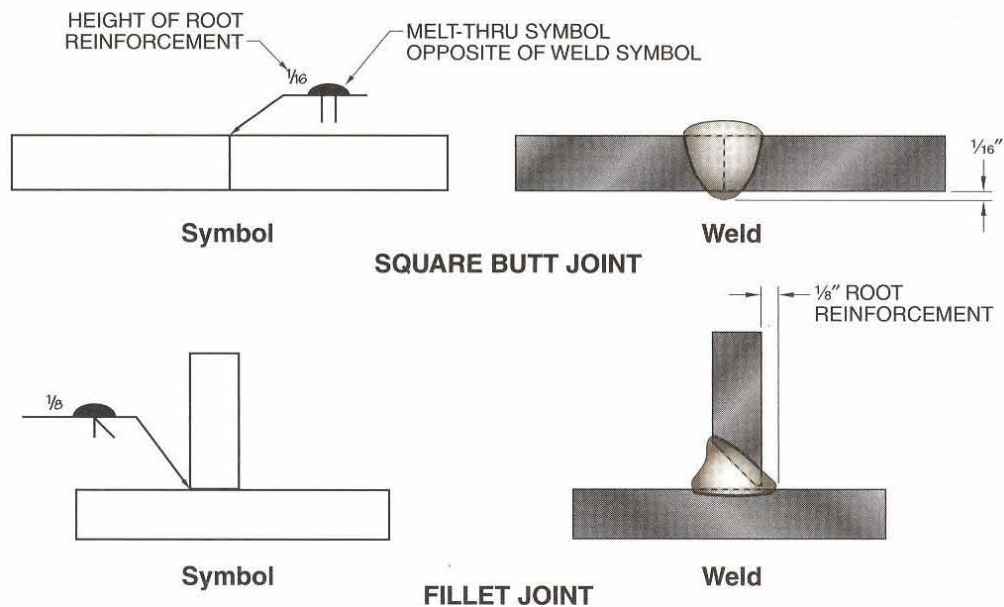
A melt-thru symbol indicates that complete joint penetration is required from one side only.
